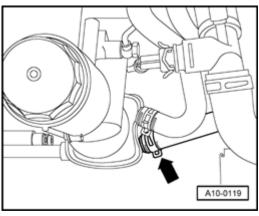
Identifying Bottom Coolant Hose Retaining Clip Courtesy of VOLKSWAGEN UNITED STATES, INC.
